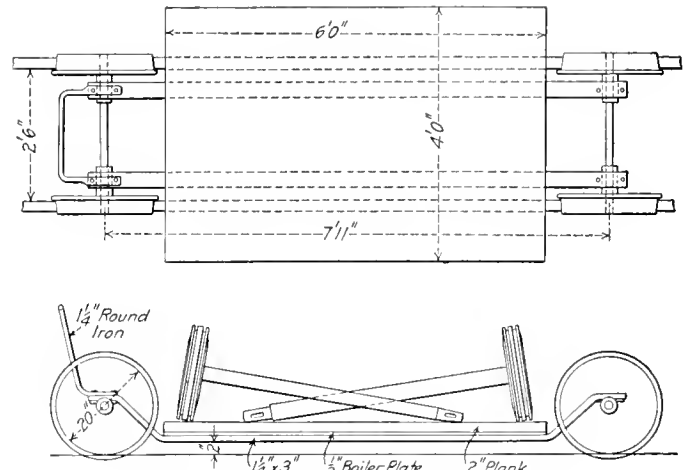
Car Used for Handling Material Between Engine House and Shops.
